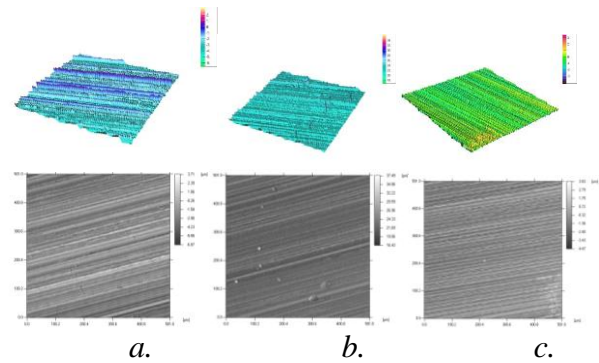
The surface textures generated by hard face milling of X210Cr12 cold tool steel with the following machining conditions: a. material hardness 22HRC, cutting speed  $v=817\text{m/min}$ , cutting feed  $f=0.63\text{mm/rev}$ , depth of cut  $a_p=0,8\text{mm}$  b. material hardness 53HRC, cutting speed  $v=408.4\text{m/min}$ , cutting feed  $f=0.25\text{mm/rev}$ , depth of cut  $a_p=0,8\text{mm}$ , c. material hardness 59 HRC, cutting speed  $v=817\text{m/min}$ , cutting feed  $f=0.25\text{mm/rev}$ , depth of cut  $a_p=0.2\text{mm}$ .
